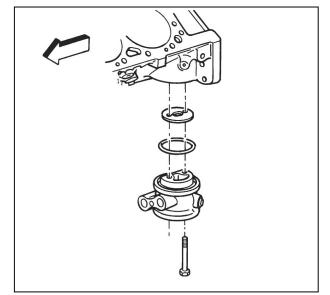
Oil Filter Adapter Equipped with Oil Cooler (Typical)
